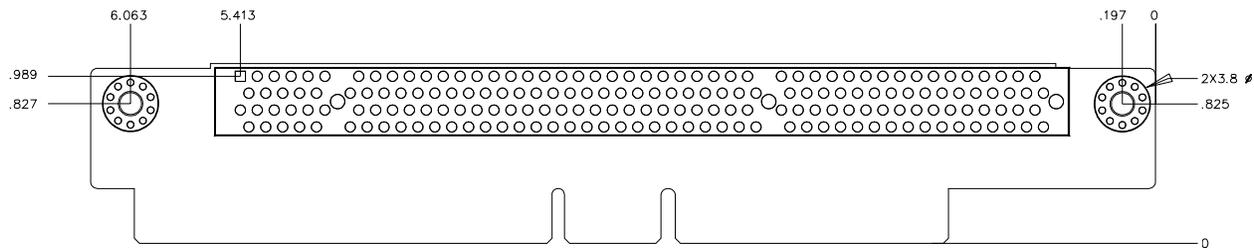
1-Slot PCI Riser Mechanical Drawing
